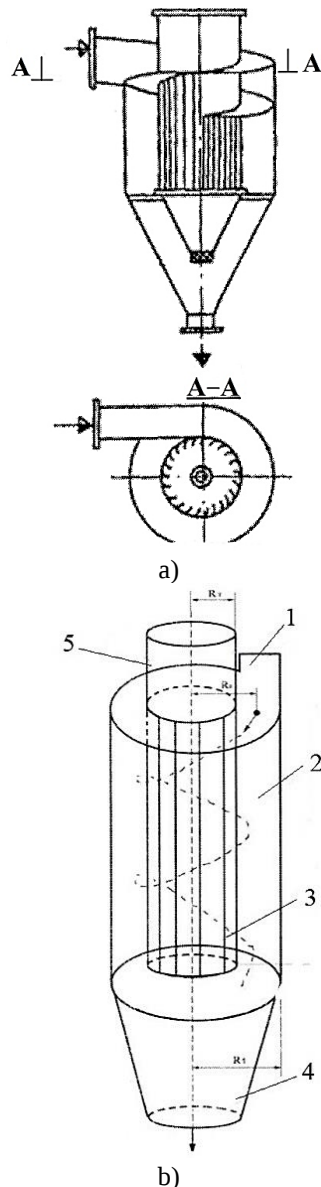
Designs of cyclones with louver elements for removal of clean air: a – centrifugal inertial dust collector designed by V.P. Kuz; b – dust collector with louver separator designed Yu.R. Dadak 1 – inlet pipe; 2 – cyclone case; 3 – louver separator; 4 – conical part of the cyclone; 5 – purified air outlet pipe.
